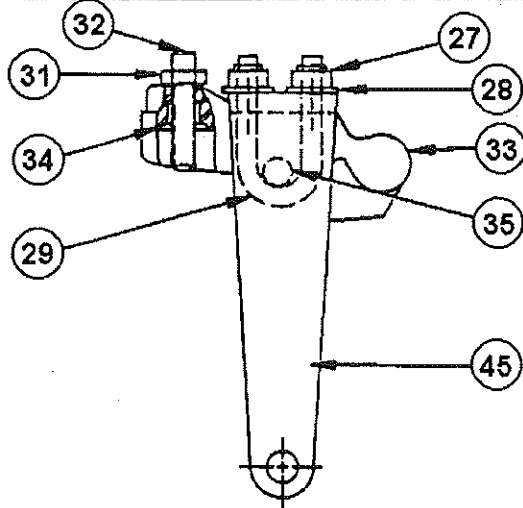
BRAKE VALVE ASSEMBLY (13516, SHEET 1 OF 2)
